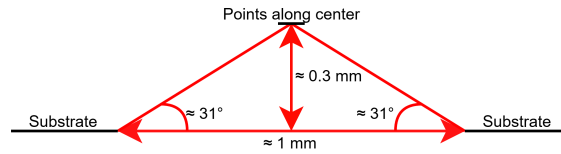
Simplified schematic of surface inclination in laser welding.
